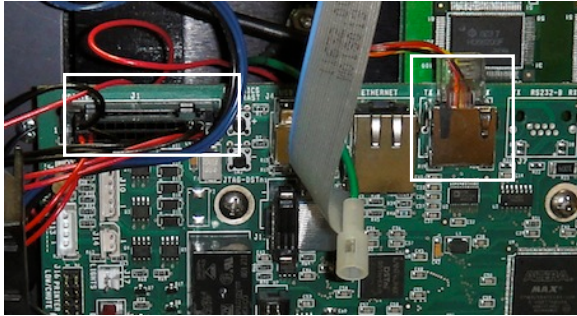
Printer Data and Power Cable Connections to PV343 Board
